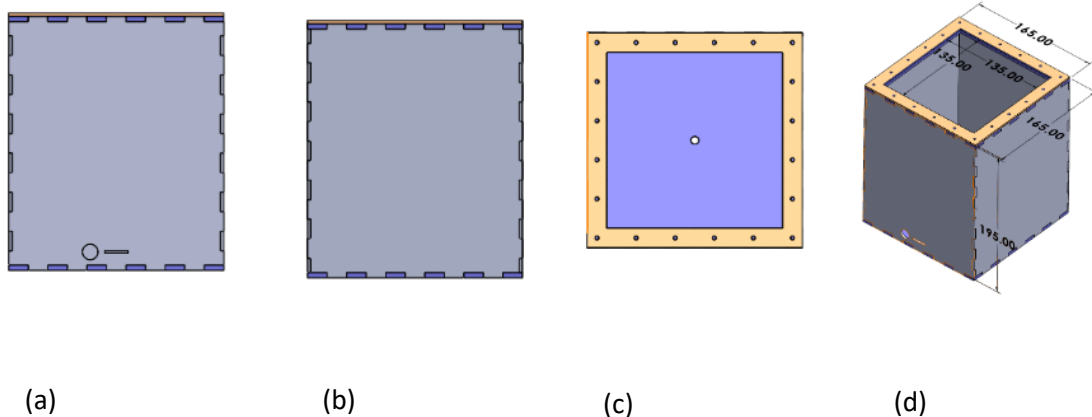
3D design of the sensor casing; (a)- Top view of the casing, (b)- Bottom view, (c)- Side view, (d)- Isometric view with dimensions
